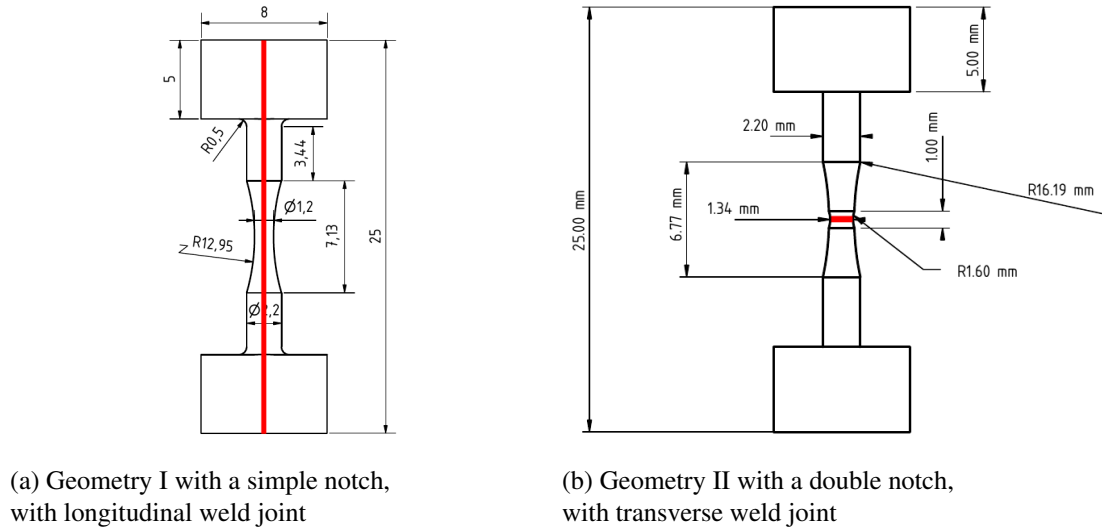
Nominal geometries of the specimens for tensile testing, and schematic representation of the weld joint orientation
